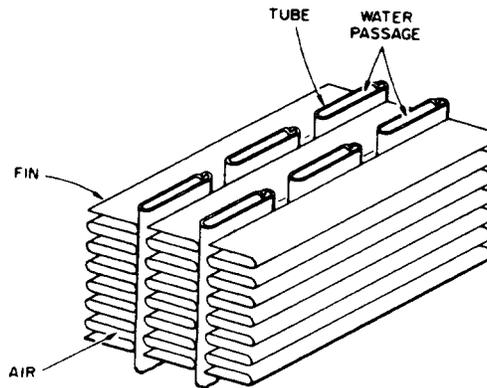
TYPICAL TUBE AND SERPENTINE FIN CORE (OFTEN REFERRED TO AS TUBE AND CENTER CORE AND CT CORE)
